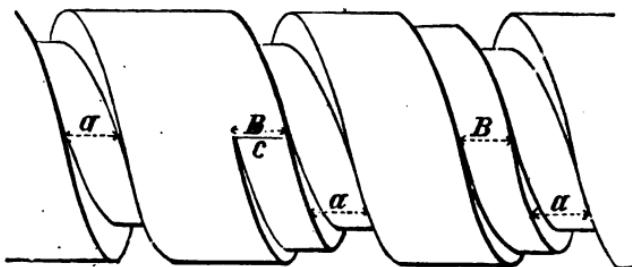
represents a thread or screw during the above described process of cutting. *a a a* is the groove or space taken out by the cuts before the tool was moved; *B B* represents the first cut taken after it was moved; *c* is the point to which the cut *B* is supposed (for the purpose of this illustration) to have travelled.
